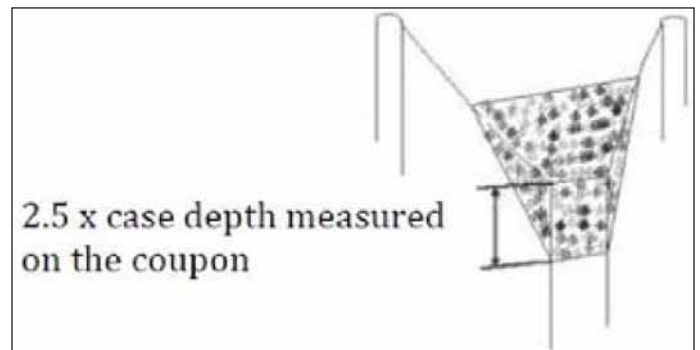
Sampling on an actual gear tooth for case-hardened layer inspection.
